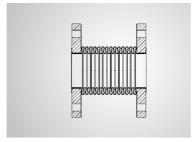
Metal bellows with rotating flanges and flange cuff
